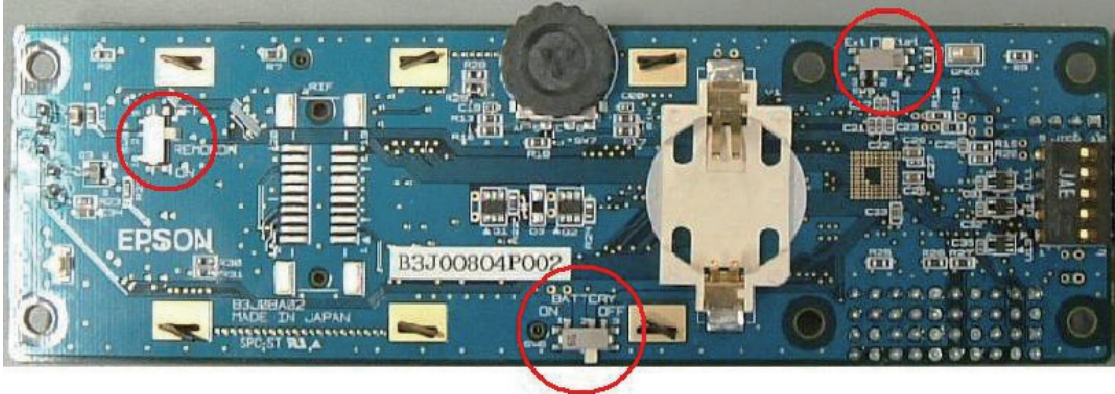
Locations of Side Sliding Switches (Back of the CPU Board)
